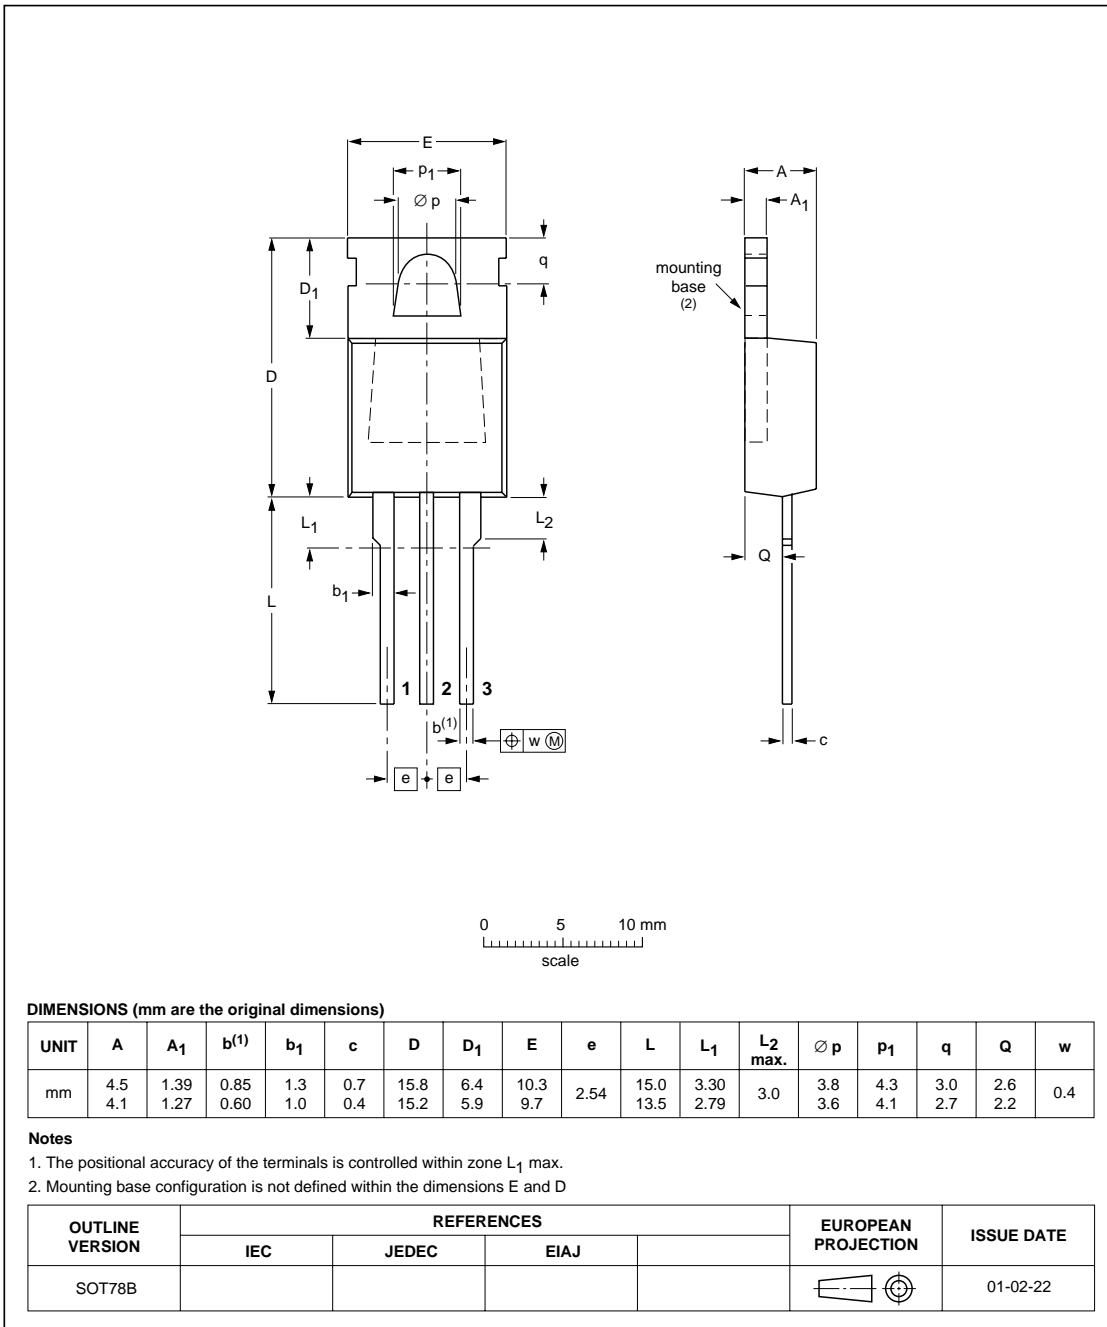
SOT78B (TO220AB) package¹, pin 2 connected to mounting base.
